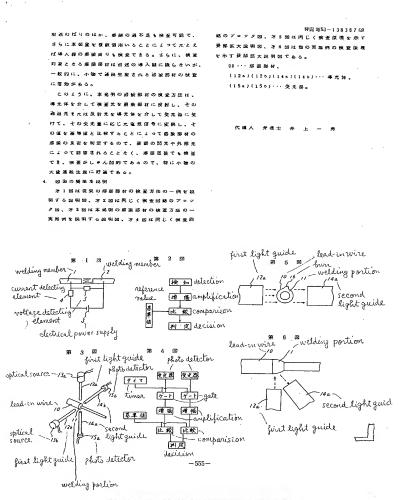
is a drawing which explains an embodiment of the method of the welding members according to the present invention.
